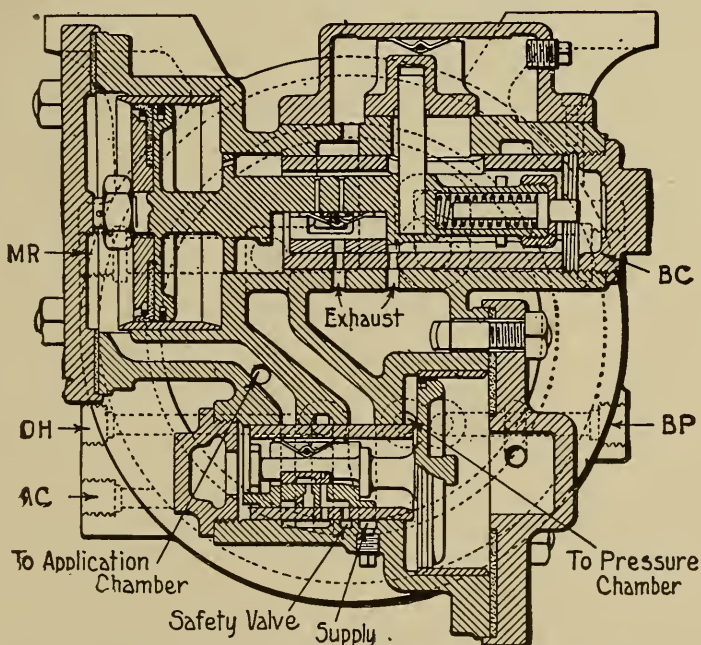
Section through Distributing Valve of "ET" Equipment.
